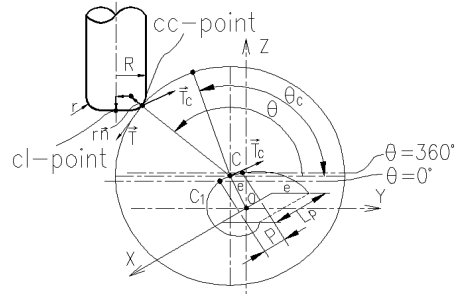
Machining mechanism between rotor and fillet end mill cutter
